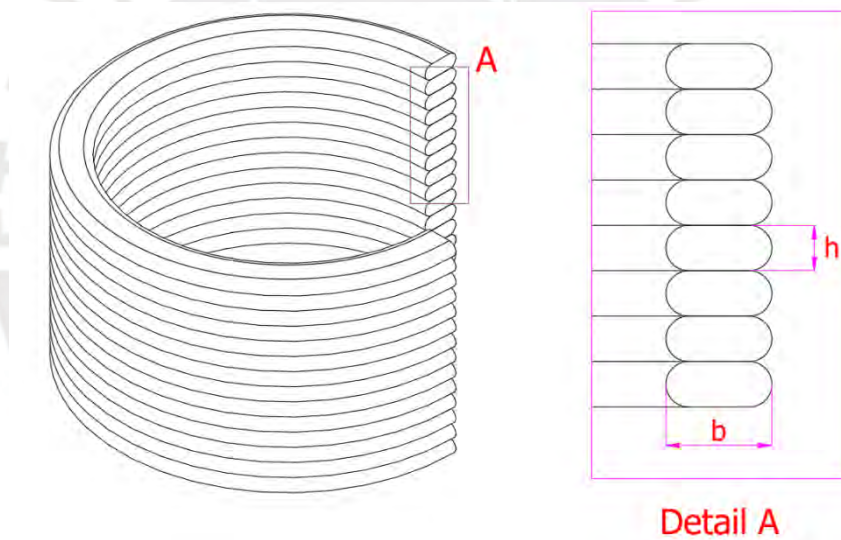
Representation of strand geometry of the cylindrical workpieces.
